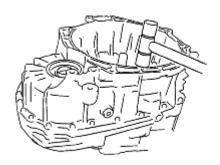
Identifying Sealant On Converter Housing Courtesy of MAZDA MOTORS CORP.
